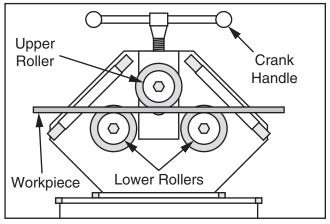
Workpiece placed on lower rollers in preparation for bending.
